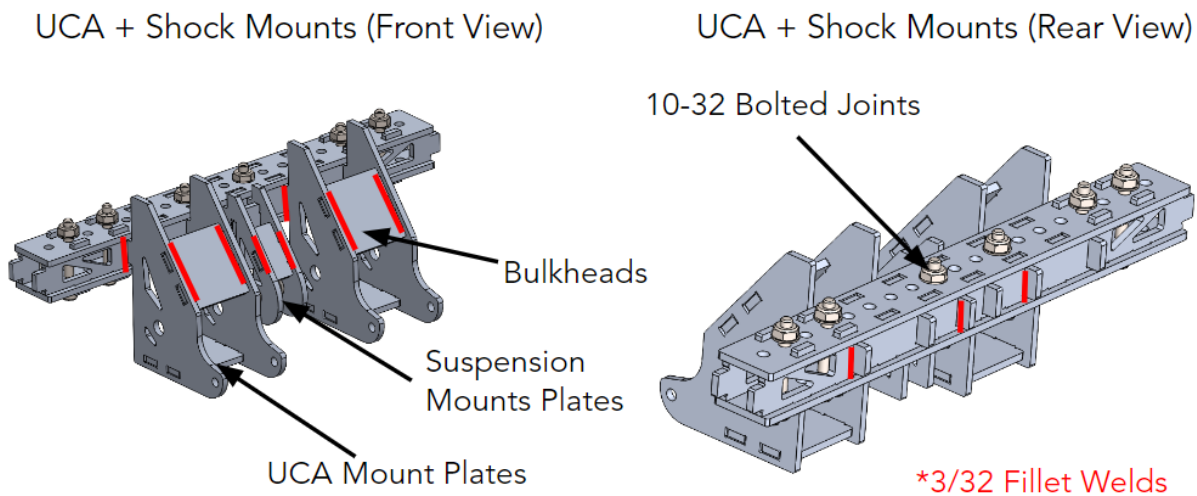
Upper Control Arm and Shock Suspension Welds
